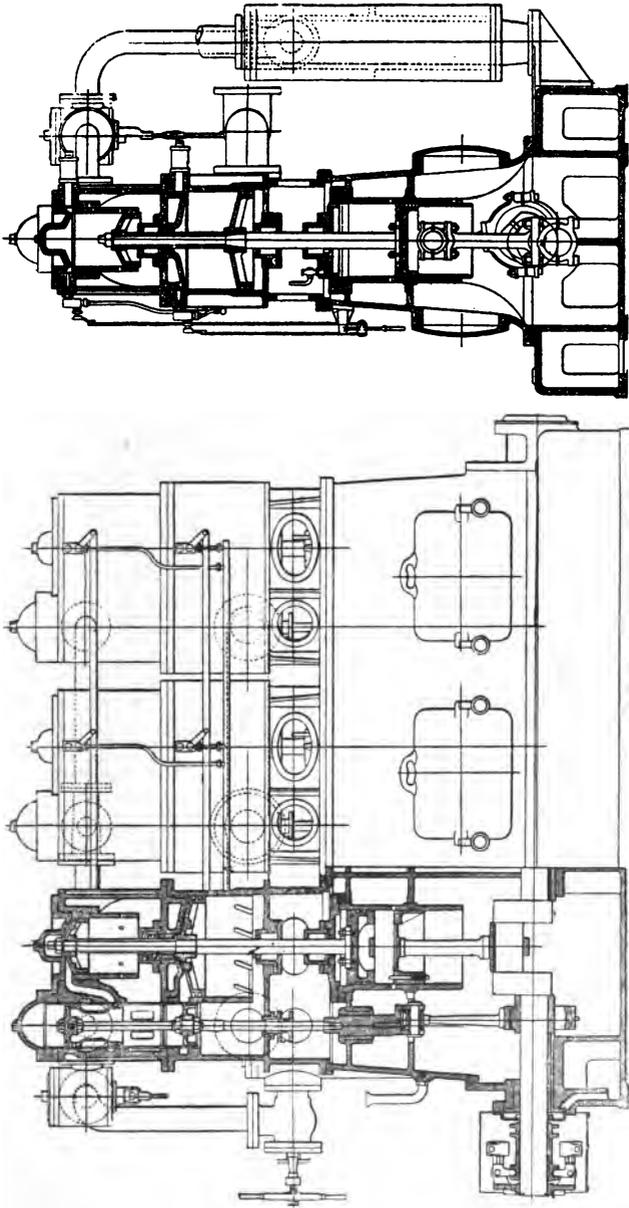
FRONT AND END SECTIONAL VIEWS OF MESSRS. ALLEY AND MACLELLAN'S 300 H.P. ENGINE.
